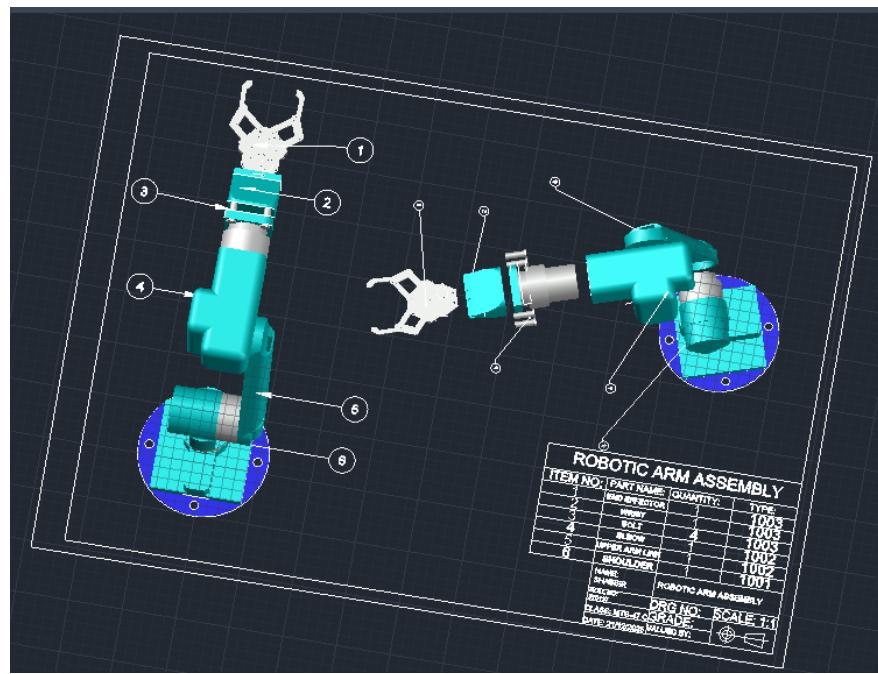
Assembled Drawing on the left, Exploded View of the Assembled Drawing on top right side and drawing table on the bottom right
